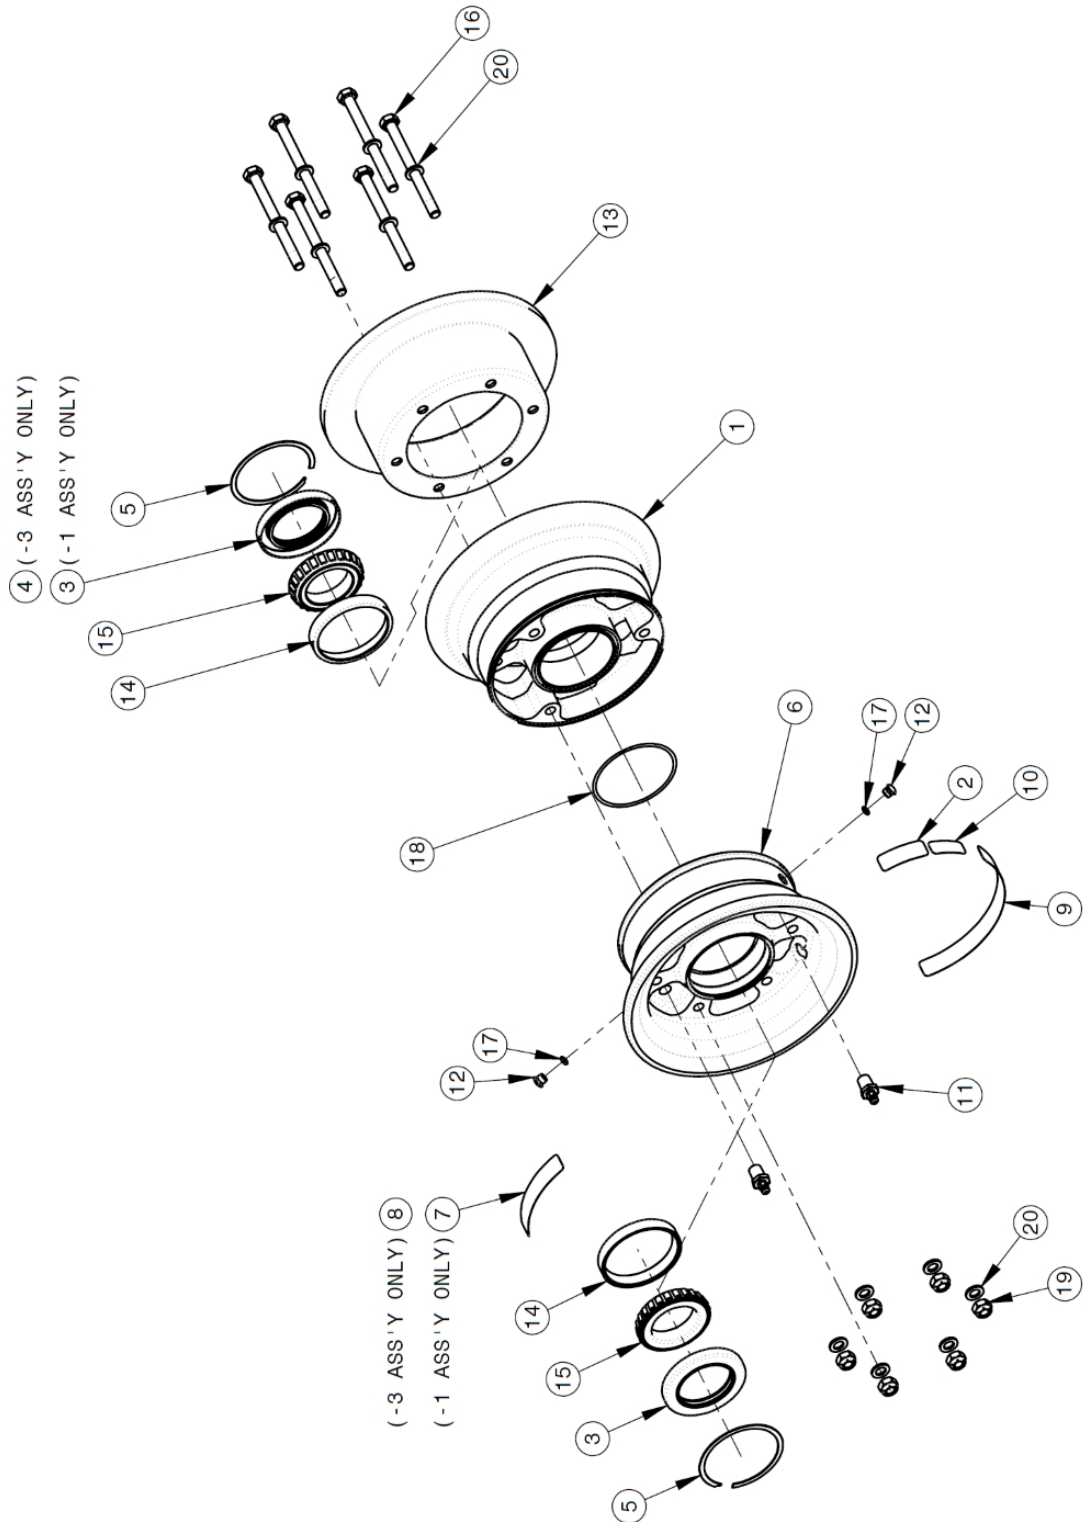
a 35A-51800, 6.00-6 MAIN WHEEL ASSEMBLY, OIL BATH TYPE
